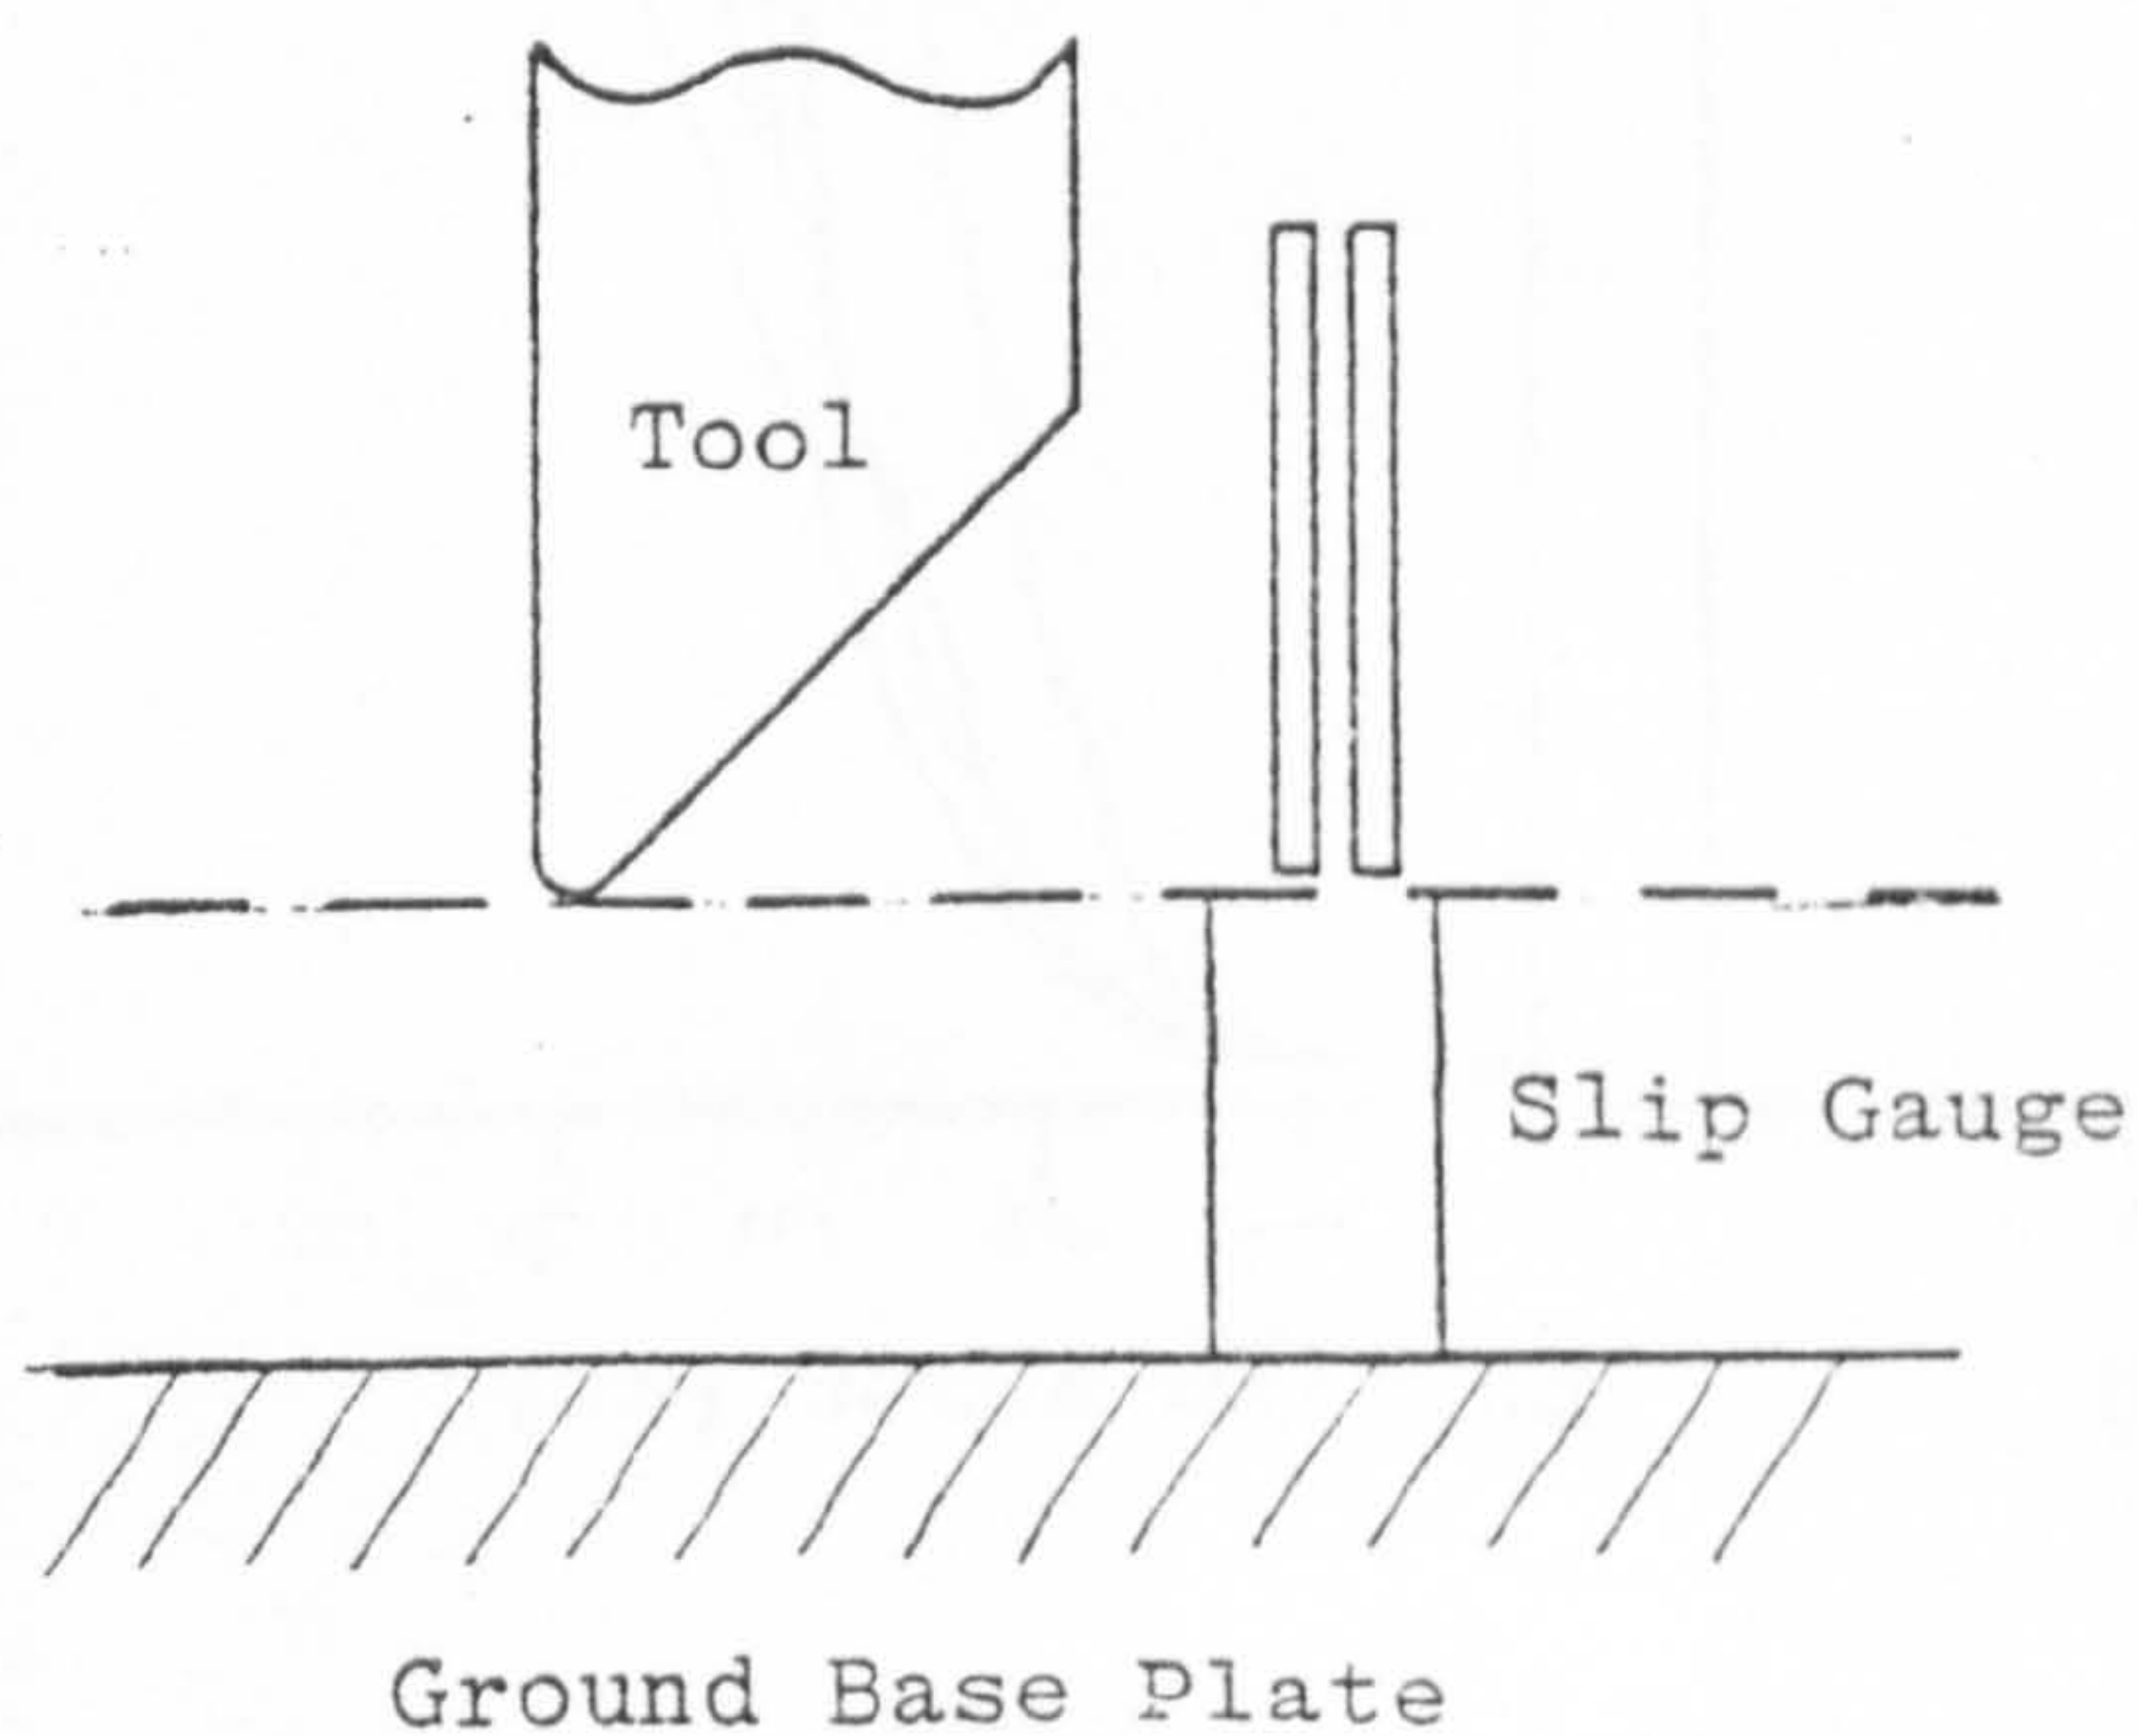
(B) INITIAL SETTING-UP OF TOOL AND AIR GAUGE
